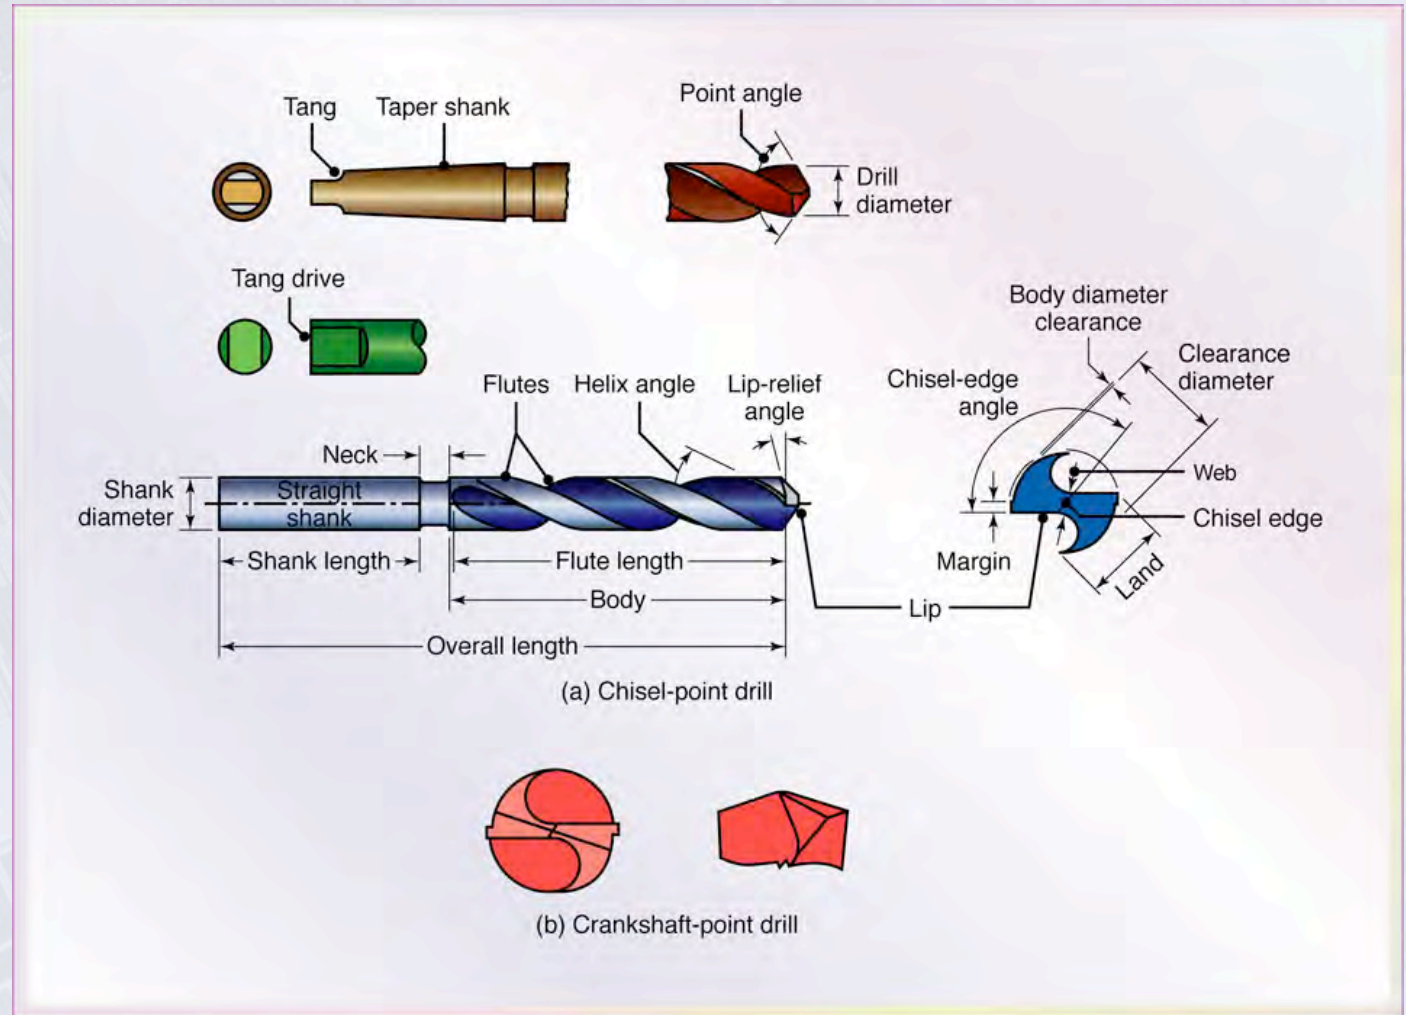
Two common types of drills: (a) Chisel-point drill. The function of the pair of margins is to provide a bearing surface for the drill against walls of the hole as it penetrates into the workpiece. Drills with four margins (*double-margin*) are available for improved drill guidance and accuracy. Drills with chip-breaker features also are available. (b) Crankshaft drills. These drills have good centering ability, and because chips tend to break up easily, these drills are suitable for producing deep holes.
